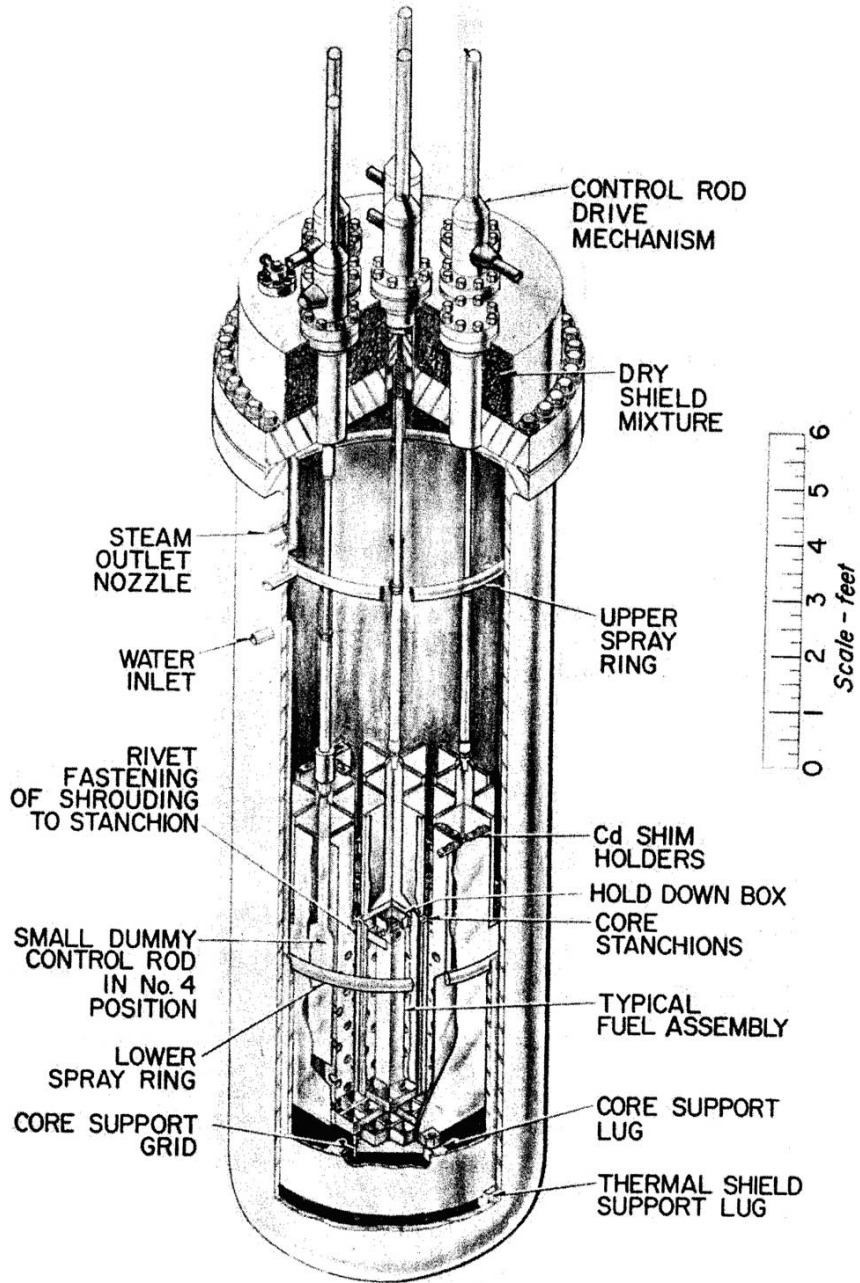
Cutaway Drawing of the SL-1 Reactor Vessel (Ref. A-49)
